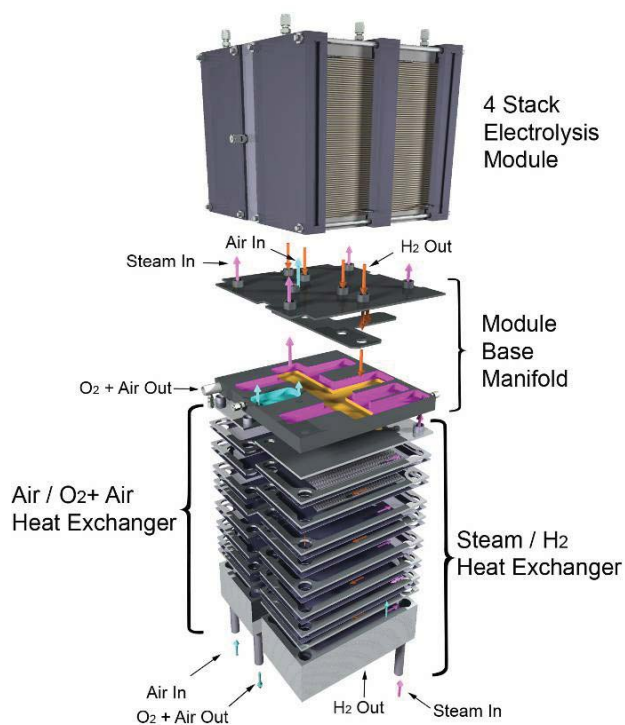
Exploded view of heat exchanger, base manifold unit, and four-stack electrolysis unit.
